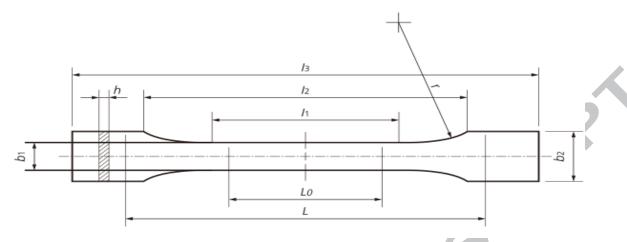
Dimensional descriptions of ASTM D638 type IV tensile specimen
